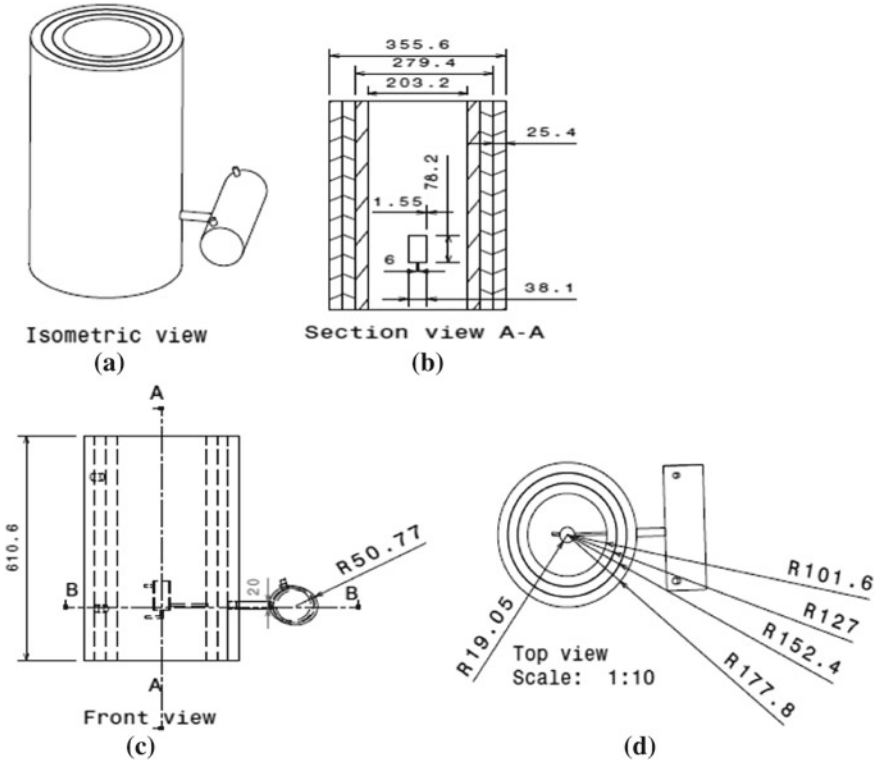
a Isometric view of test section b sectional view c front view d top view
